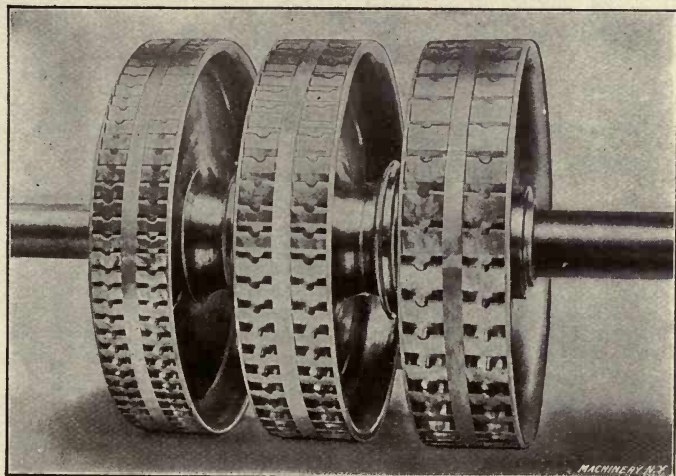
Three-stage Rotor for Sturtevant Steam Turbine
